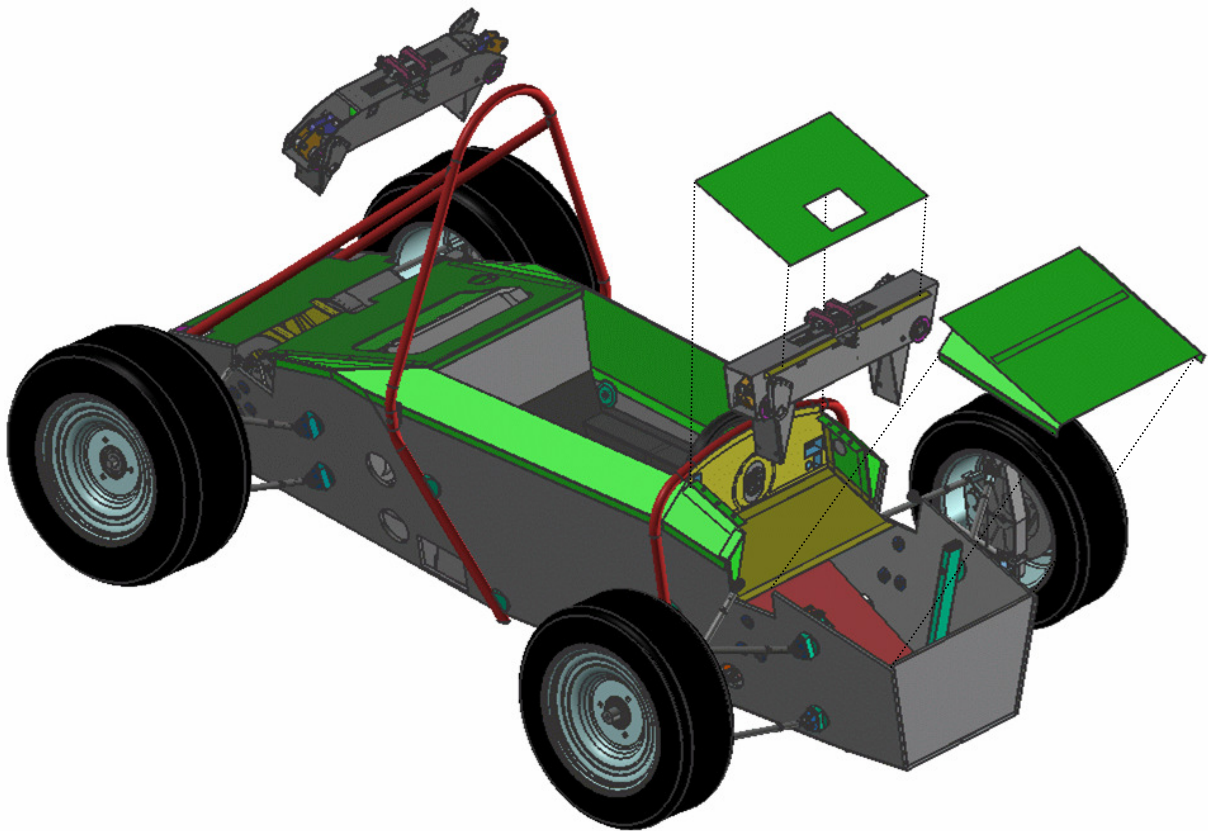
Placement of the suspension boxes front and rear onto the FSRTE02 chassis
